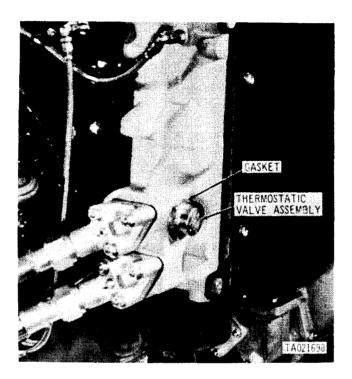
Removing or installing engine oil cooler thermostatic valve assembly.
